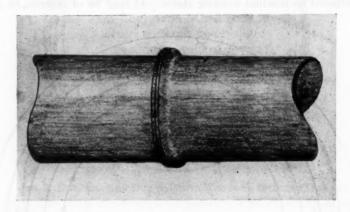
Pipe Sections Flanged, Ready for the Peripheries to be Welded
